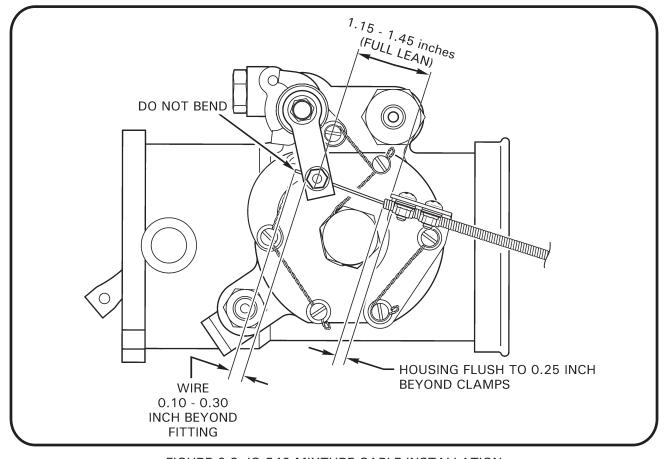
IO-540 MIXTURE CABLE INSTALLATION
